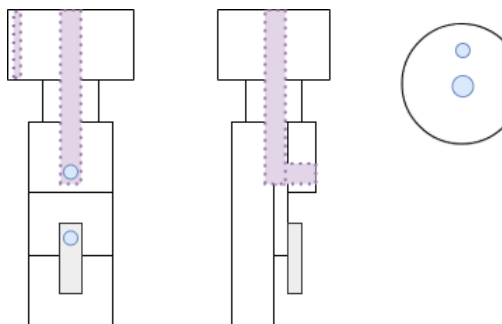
Front, side, and top views of the sample holder component. Purple dashed lines indicate through holes. A metal clip in the front allowed samples to be held firmly in place.
